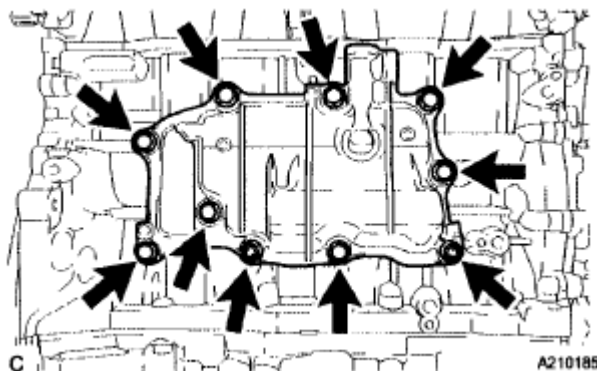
Locating Ventilation Case Sub-Assembly Bolts And Nuts
